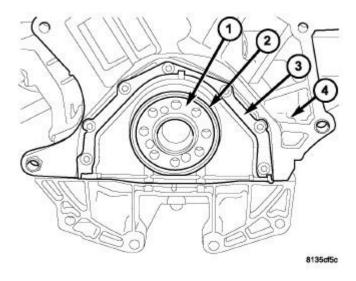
REAR MAIN SEAL AND RETAINER Courtesy of CHRYSLER LLC
